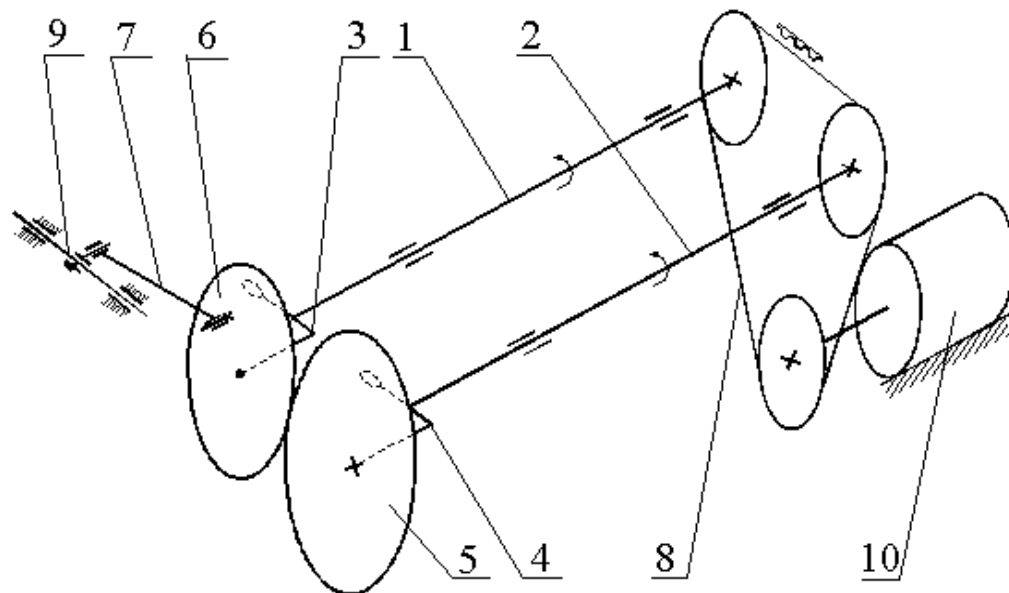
Gear-lever planetary mechanism: 1,2 – shafts, 3,4 – cranks, 5 – central wheel, 6 – satellite, 7 – connecting rod, 8 – toothed belt transmission, 9 – slider, 10 – engine
